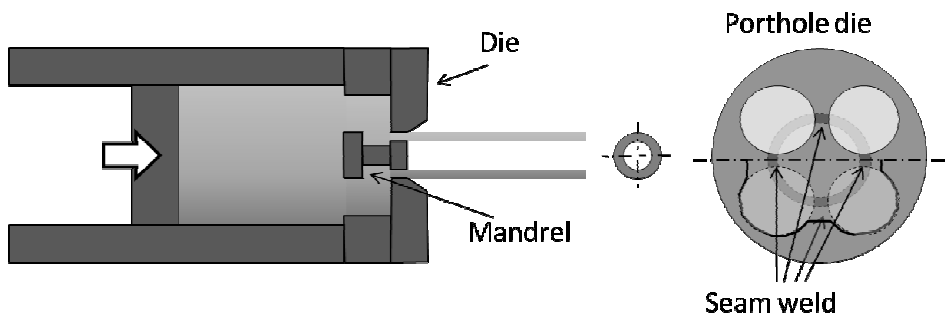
Schematic representation of mandrel die and seam weld localization.
